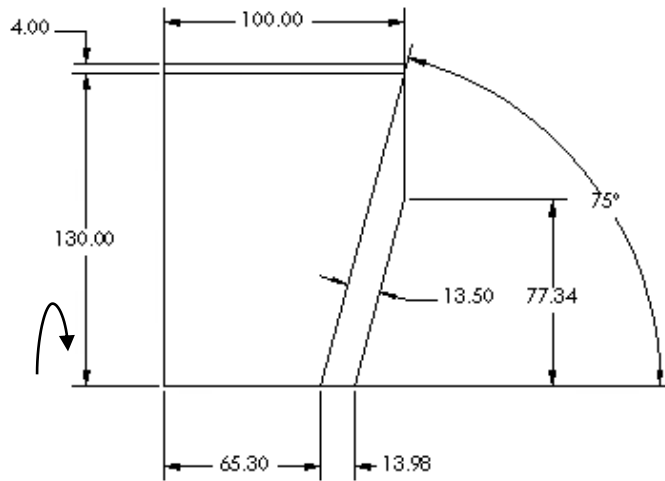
2D Drawing of 7.64 kg TNT Shaped Charge with 13.5 mm Liner Thickness (Dimensions are in mm).
